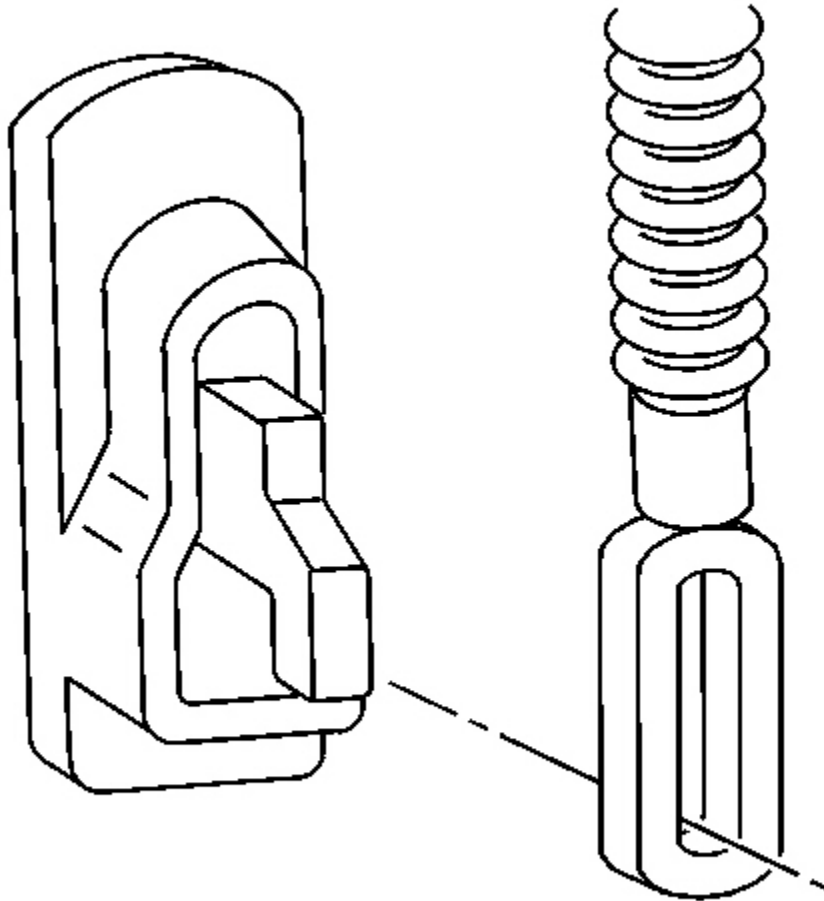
Rear Park Brake Cable To Rear Suspension Mounting Bracket
